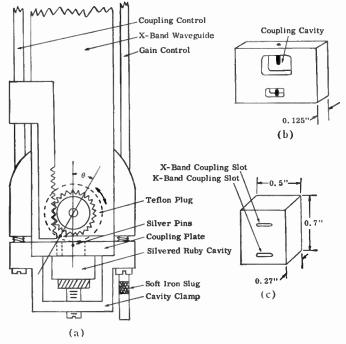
The maser cavity assembly showing (a) complete assembly,(b) coupling plate containing the coupling cavity, (c) the silvered ruby cavity.
